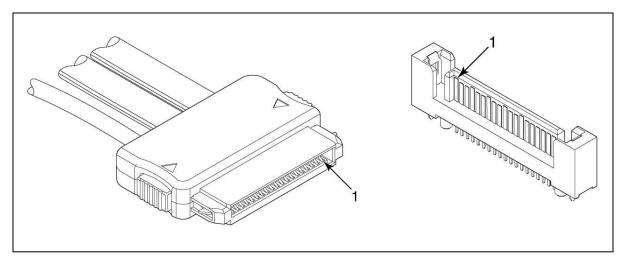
Isometric drawings of the internal 2 lane cable and connector
